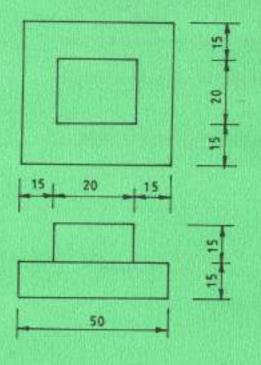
shows the plan and elevation of a block. Use the given layout and draw the block in two point perspective. (15 marks)
